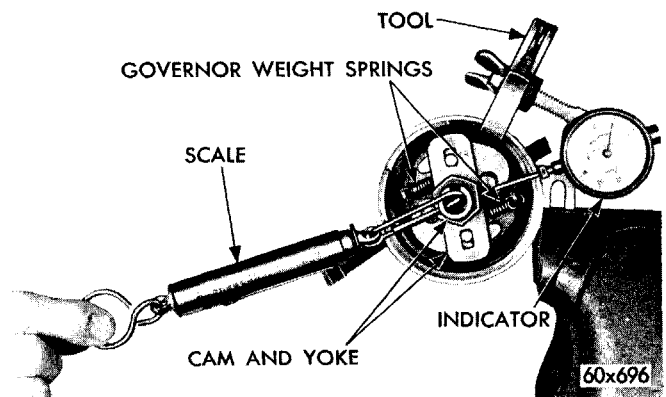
Checking Distributor Shaft Side Play—6 Cylinder (Typical of 8 Cylinder)
